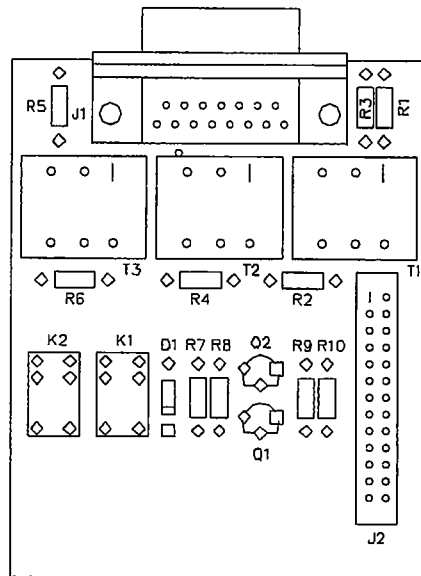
Assembly Drawing—OPT-100 Module Rev. A
